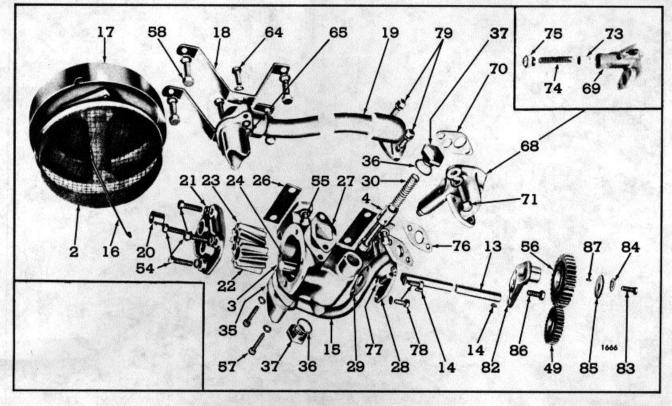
Oil Pump Details and Relative Location of Parts.
